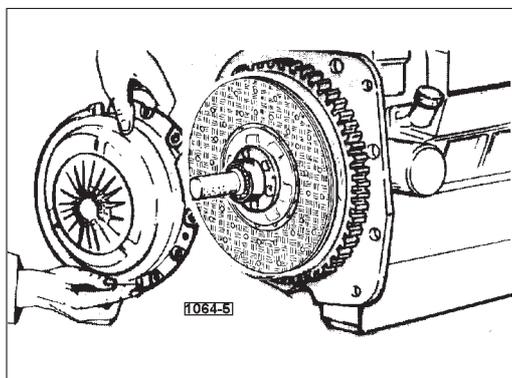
Installing clutch assembly through n. 5.9030.256.4/10 equipment.
